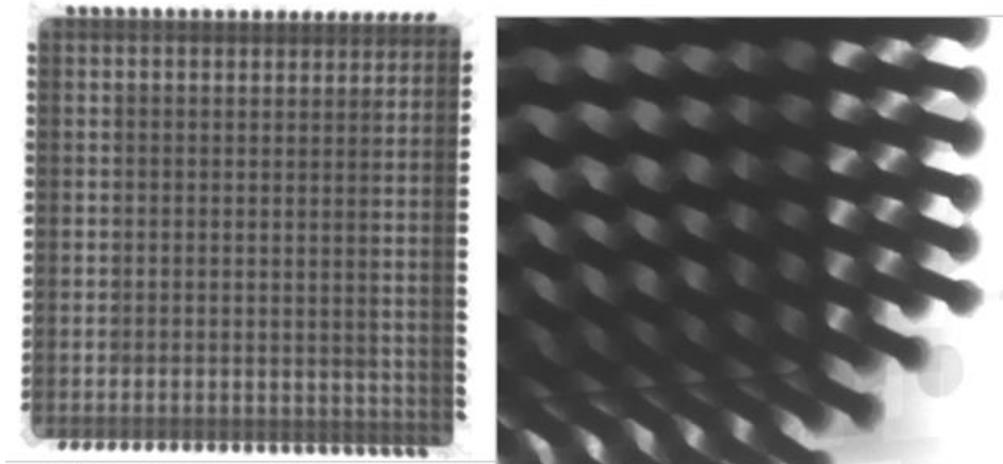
X-ray imaging of the CCGA 1272 assembled board prior to thermal cycling
